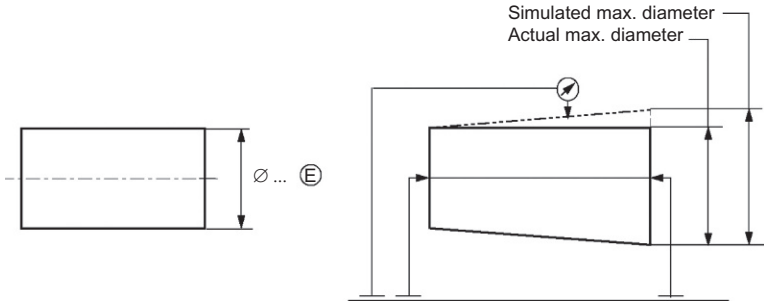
Inspection of the envelope requirement: failure caused by insufficient adjustment of the workpiece feature
